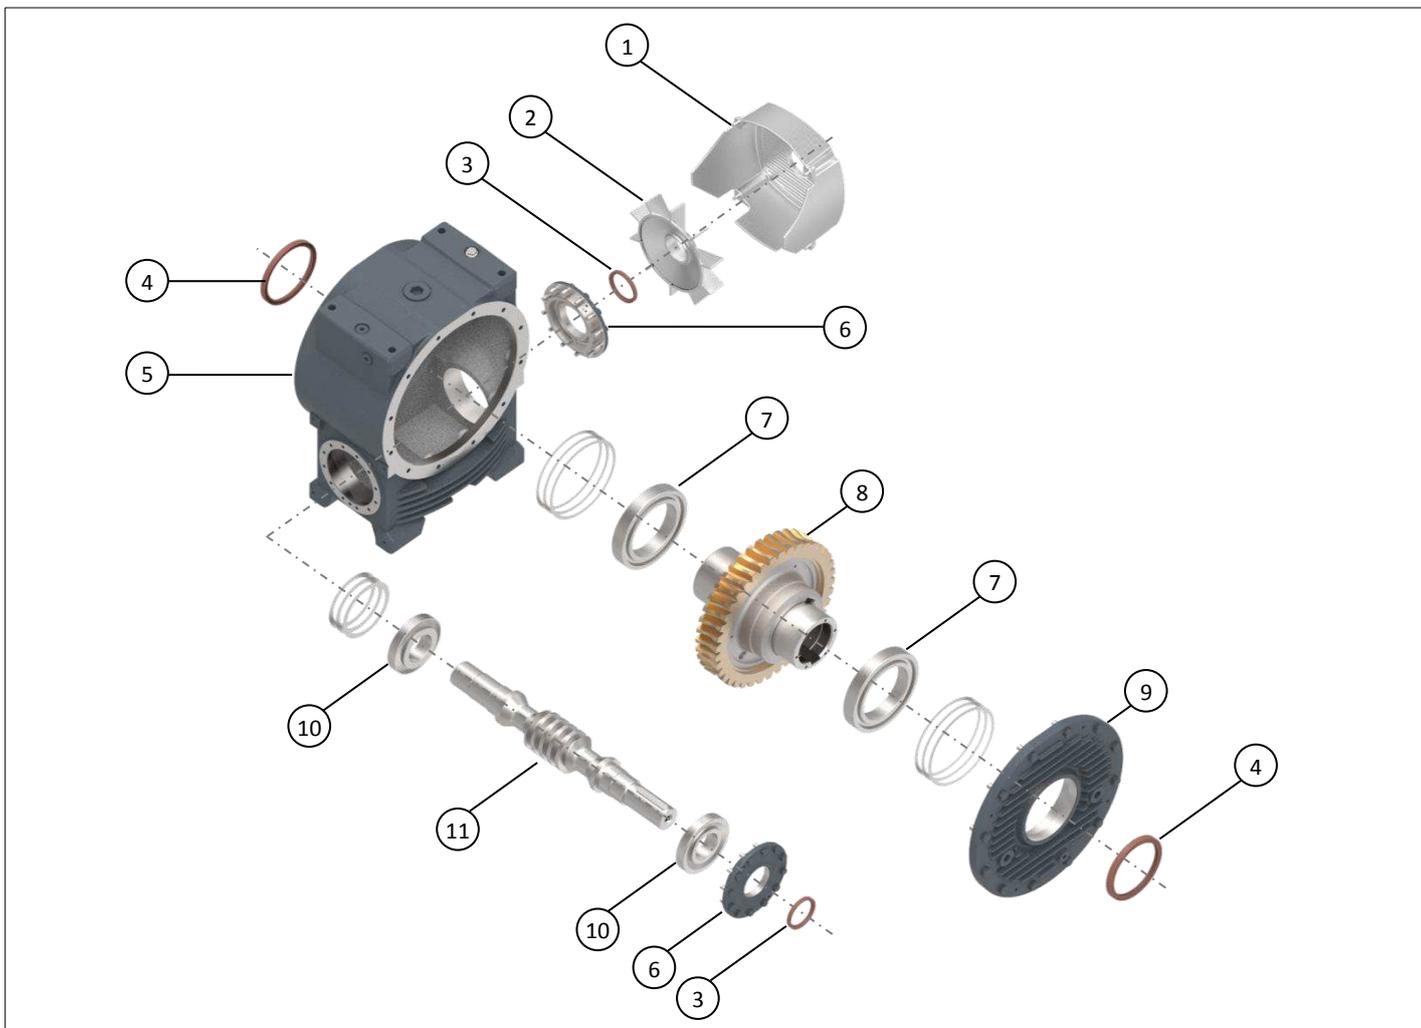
Exploded view of sizes S200.1 - S450.1
